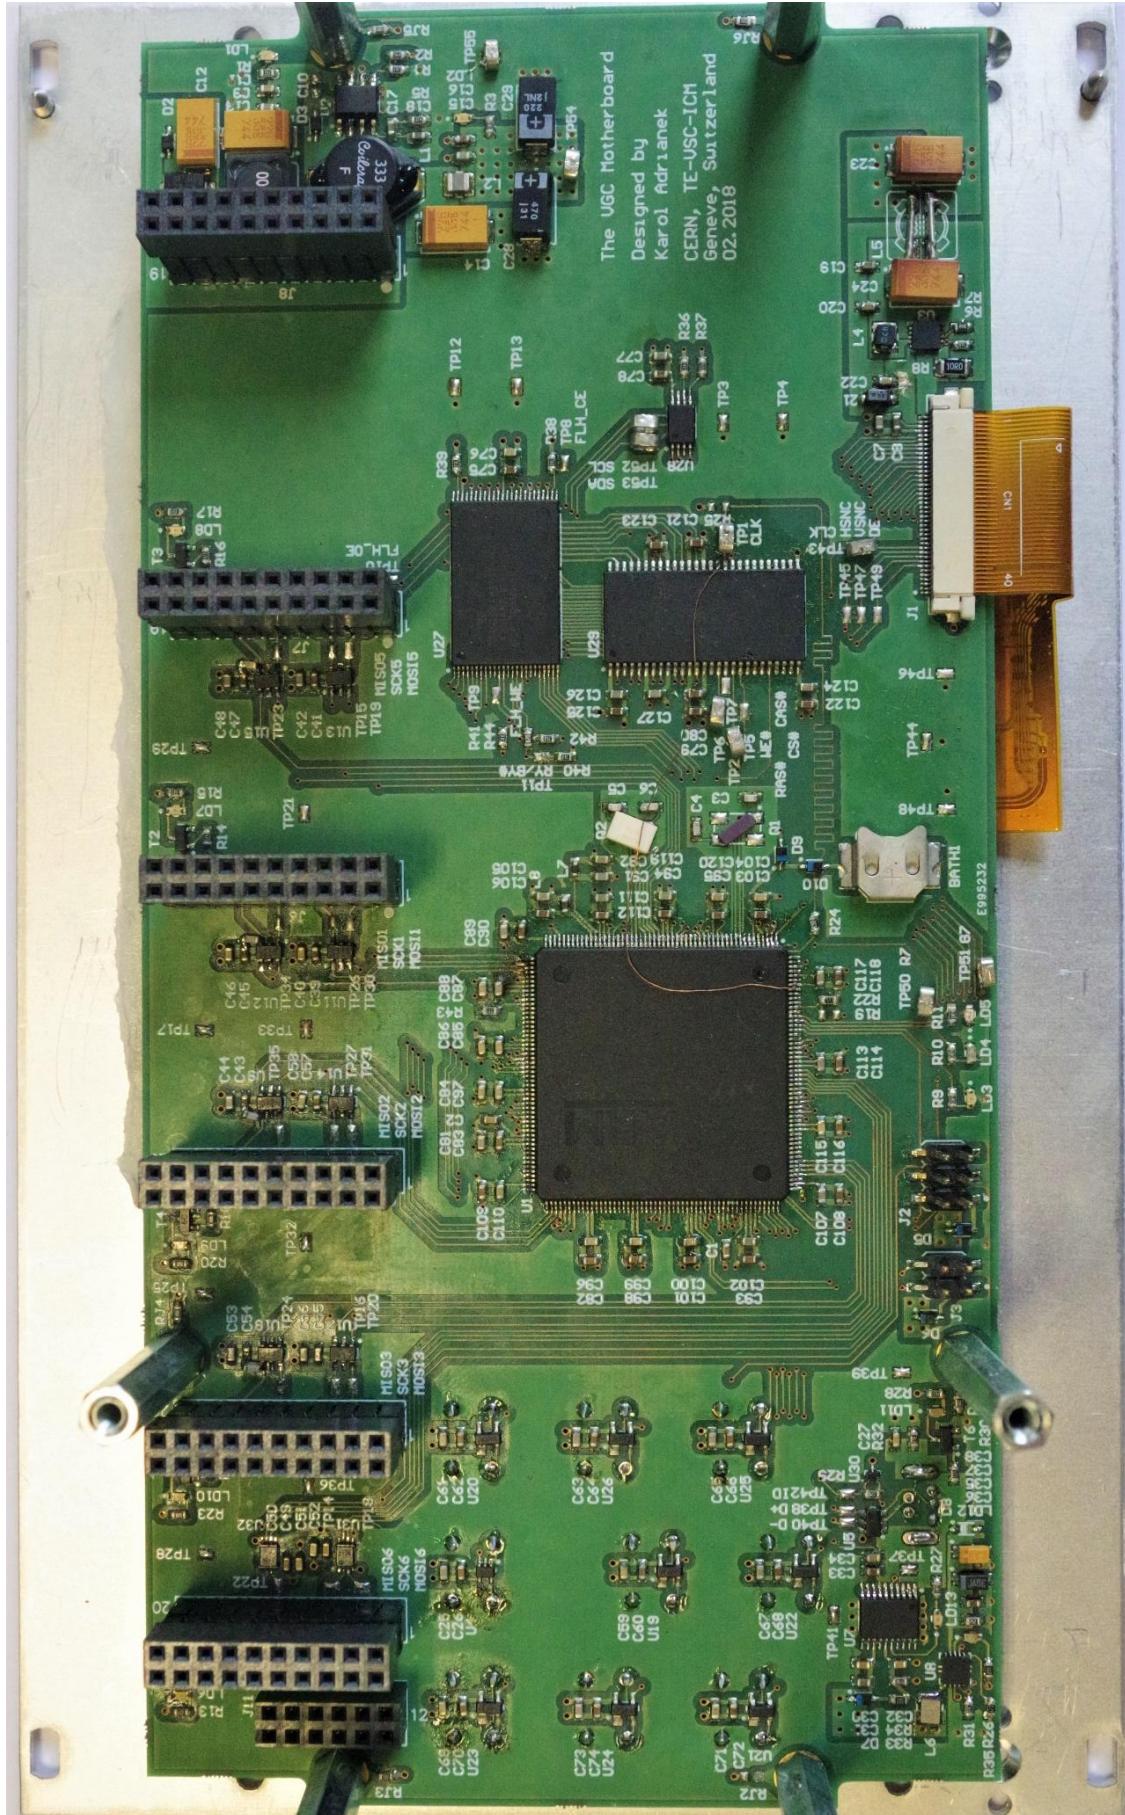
The Motherboard fixed to the mechanical chassis front panel [100].
